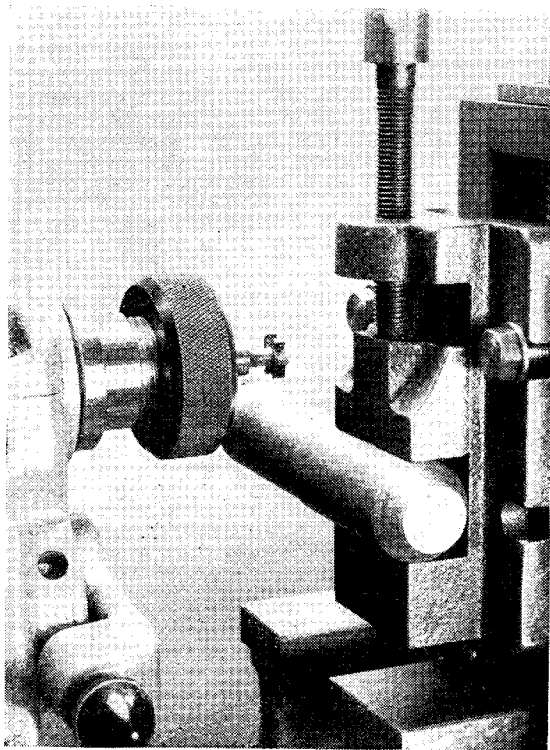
The shaft held in a machine vice secured to the vertical slide
